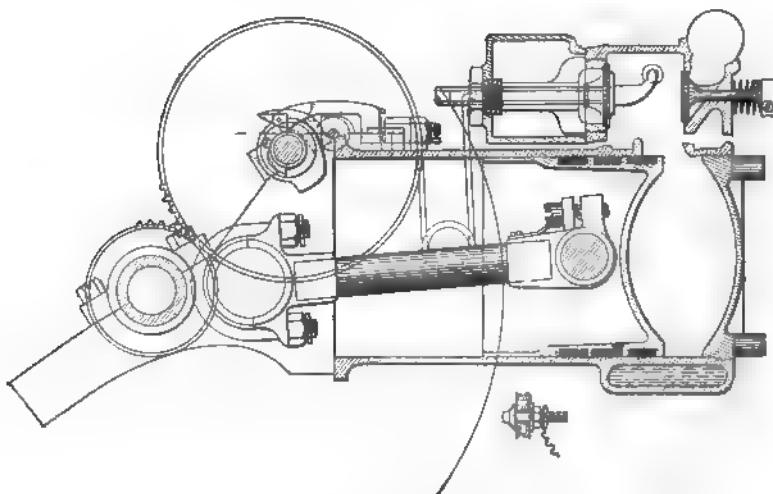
Sectional View through One Cylinder of the Duryea Three-Cylinder Engine, showing working parts. The exhaust cam operated by a two-to-one gear imparts a double motion to the valve pushrod; a lift for opening the valve, and a double twist for making and breaking the connections of the electrical spark. The valve and sparking chamber is projected so as to show the position of contained mechanism on a plane different from that of the cylinder section. Details of the insulated sparking anvil are shown below the cylinder. It is an iron contact point, having a mica washer on the inside and the outside of the cylinder walls, and a mica bushing between, so as to perfectly insulate it from the metal of the engine. A very short water jacket and the concave cylinder and piston heads are also exhibited in this figure.
